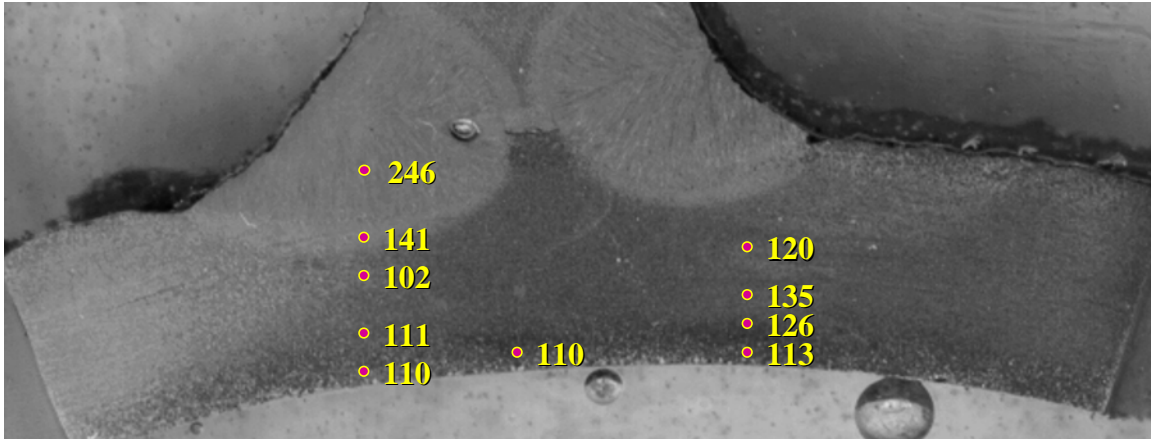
Micrograph of an etched section of tube #2 showing a SAC "pit" on the inner surface under the longitudinal attachment weld. Notice the differences in grain size through tube thickness.
